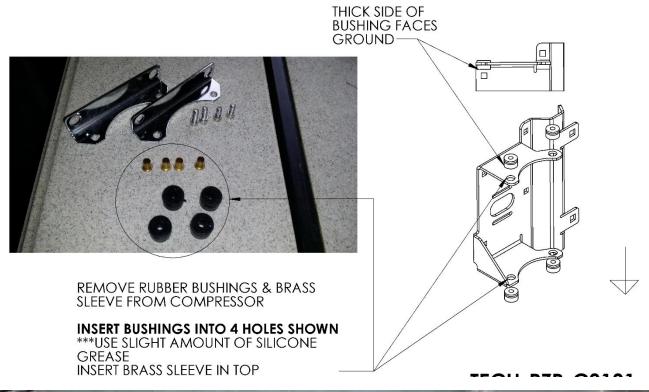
Air Compressor Bracket with Rubber Grommets Installed
